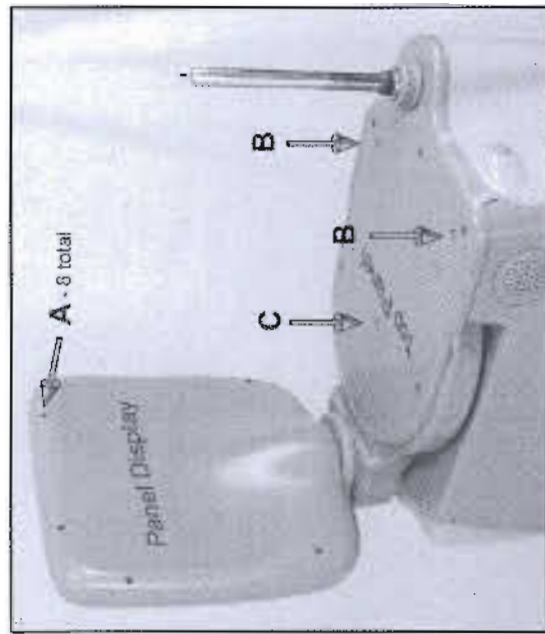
Fastener Locations for Top Panel and Panel Display (rubber mat removed from top to expose fasteners). The Top Panel must be removed before the Upper Side Panel can be removed in Figure 3-4.
